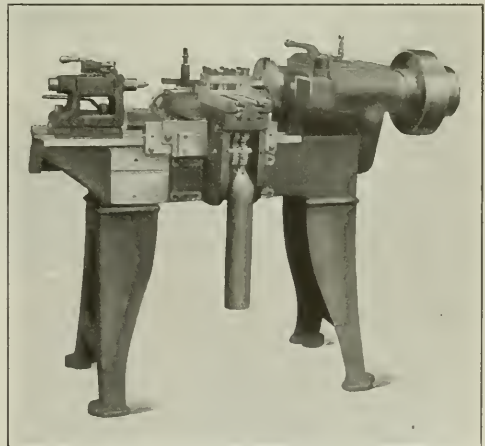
Construction of Facing Attachment mounted on Rear of LeBlond Rapid-production Lathe
